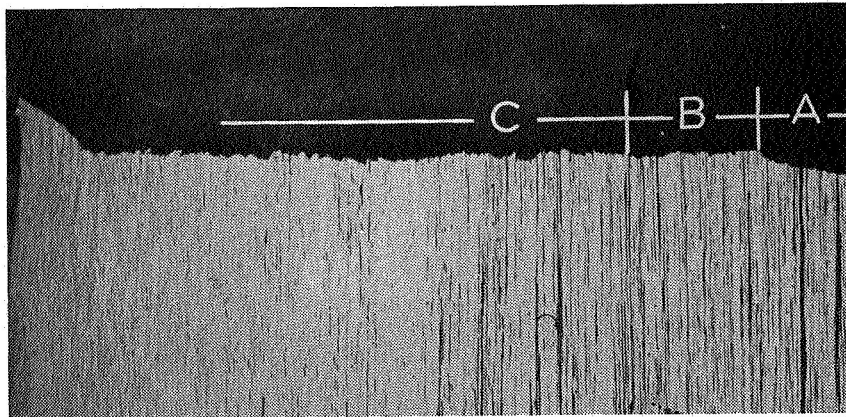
Macroscopic view of surface-flawed fracture-toughness specimens
